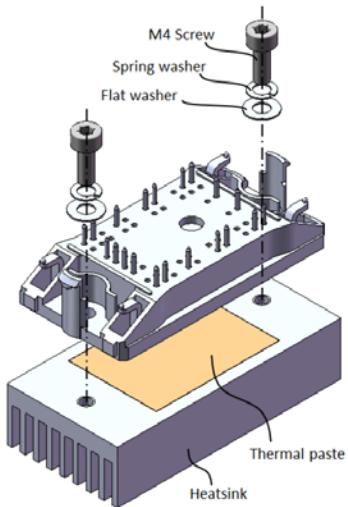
Q0/Q1 Modules – Mounting to Heatsink
